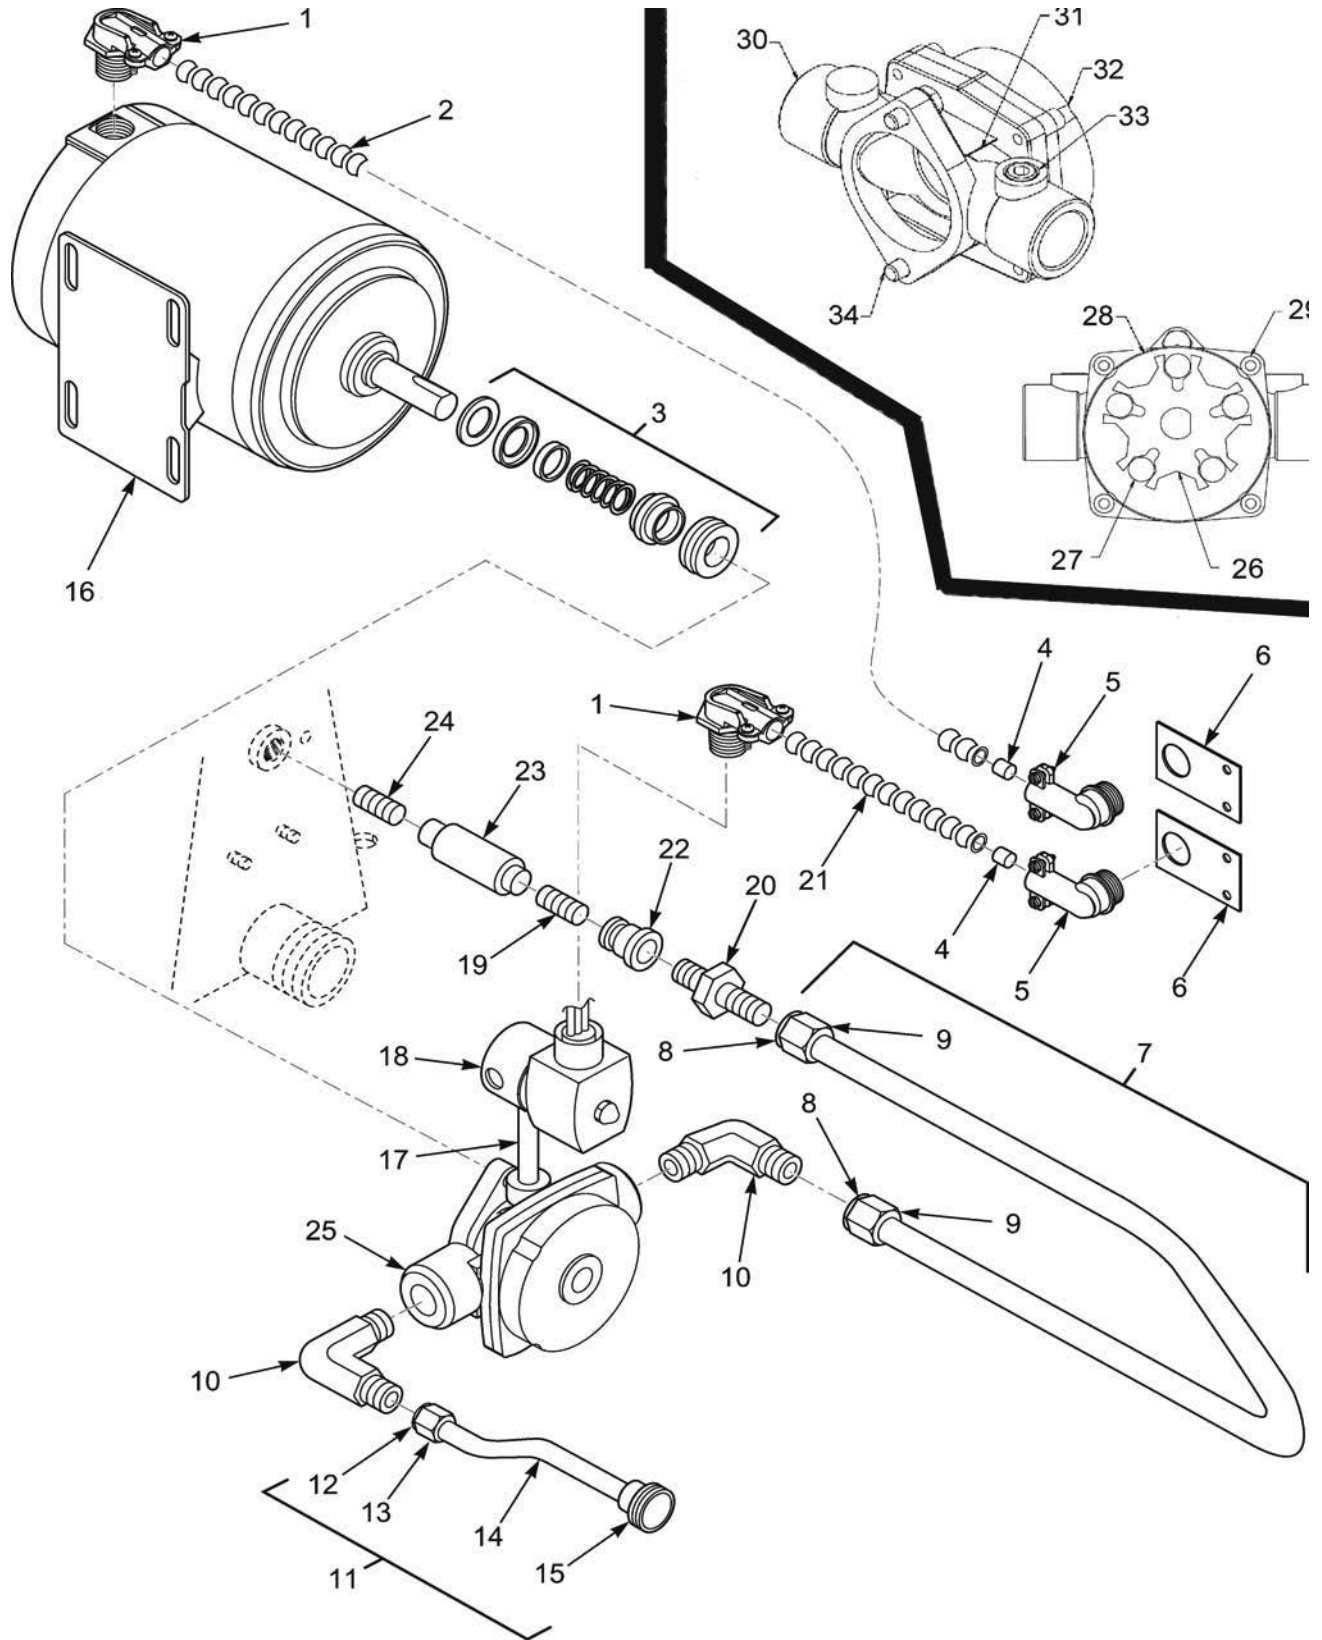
Filter Pump Assembly (SN: LH015JC & Below)
